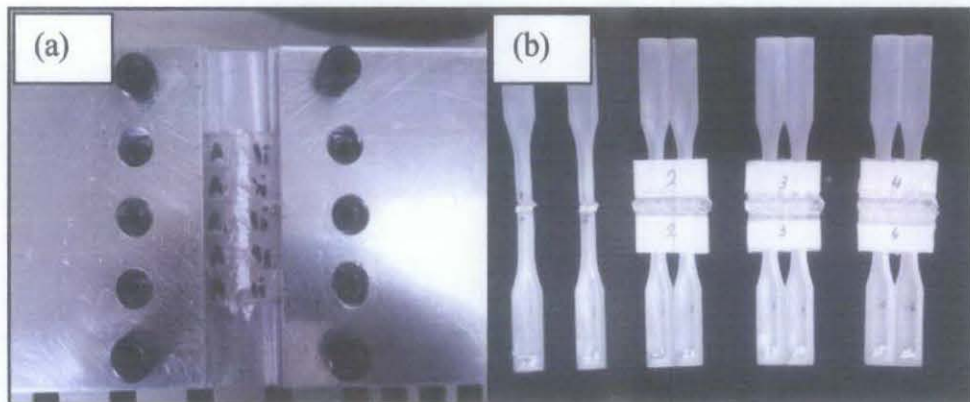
(a) The output of FSW process on PP workpiece. (b) The dogbone shape PP finished product after FSW process; ready to be test.
